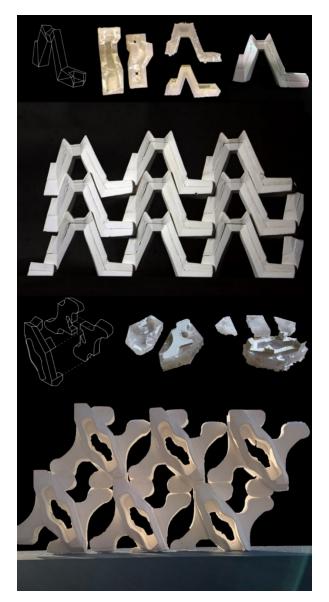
3D printed elastic mold and the cast pieces shown in the assembly work by Logan Osborn (top) and Jack Burleigh (bottom).
